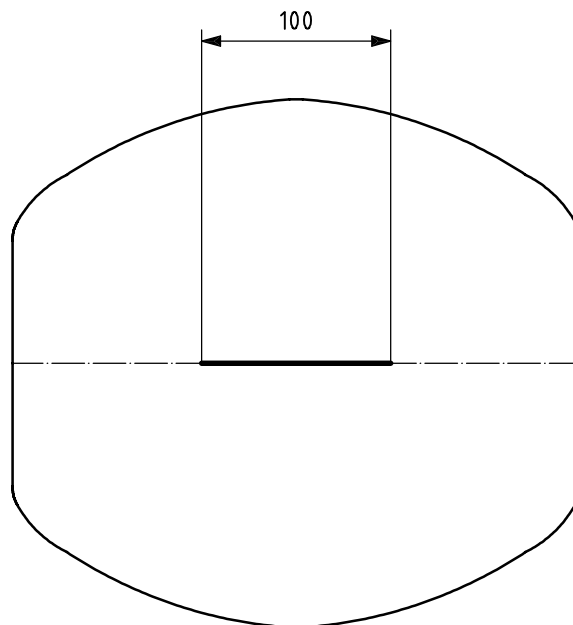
Welds radiography of container with circumferential weld only
